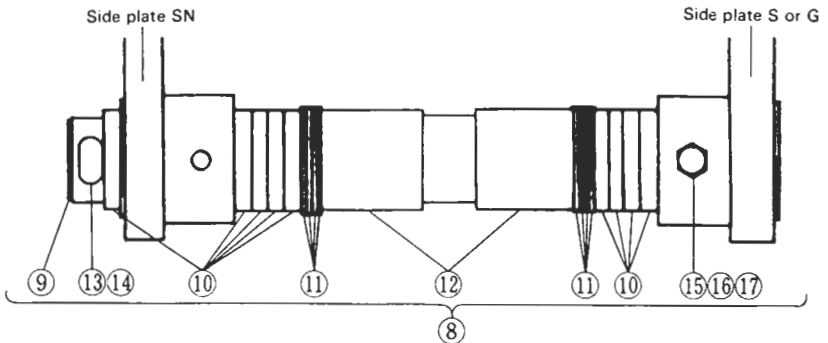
Suspension shaft W30 assembly. (5 t)
